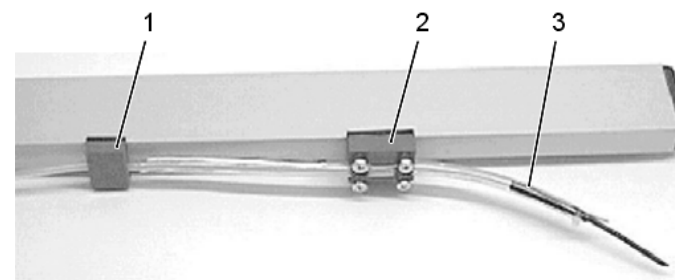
Fixing the Retainer Blocks to the Swing Arm (Example for demonstration)
